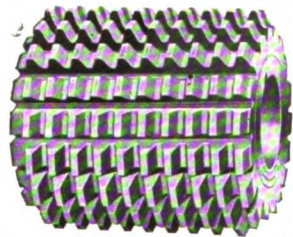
Hob for Spur or Spiral Gear, Single Thread
